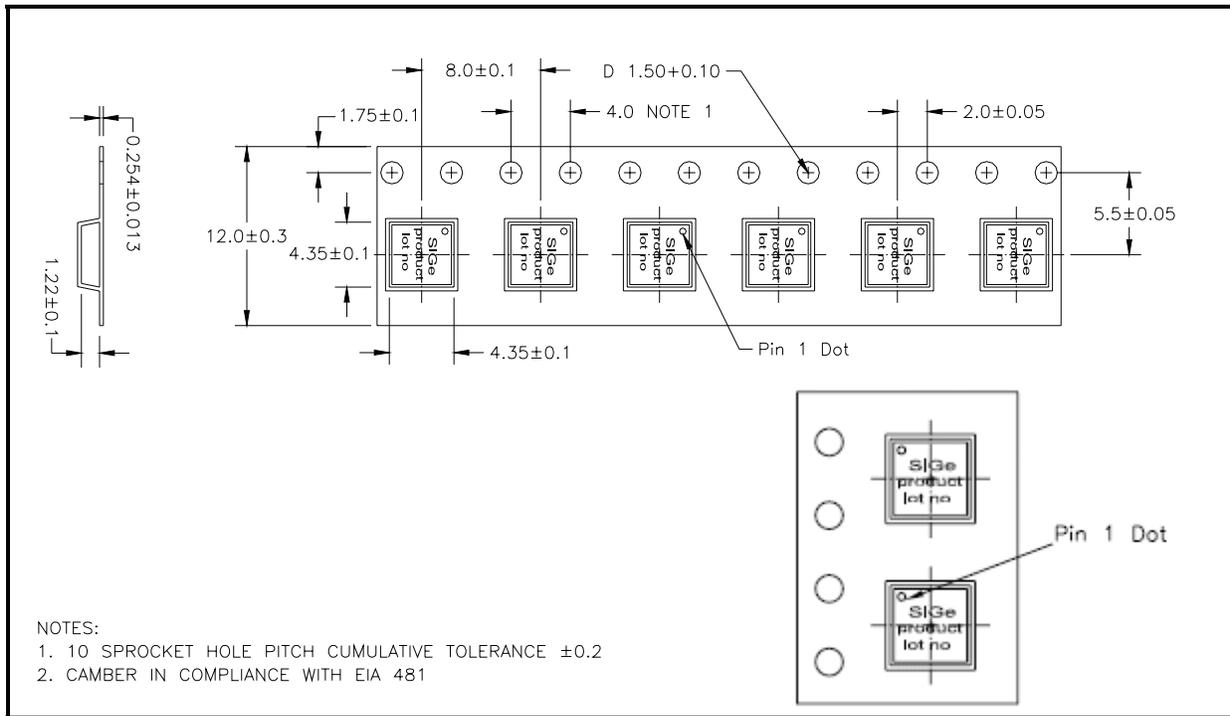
Detailed Tape and Reel Information (All dimensions in Millimeters)
